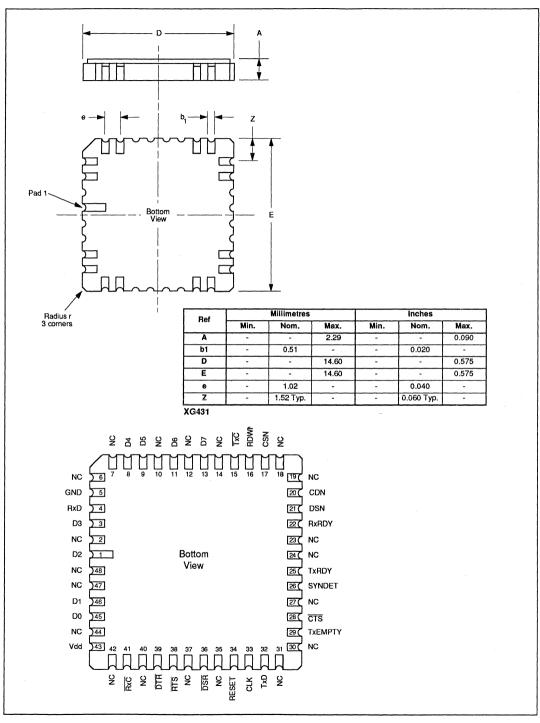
48-Pad Leadless Chip Carrier - Package Style L
